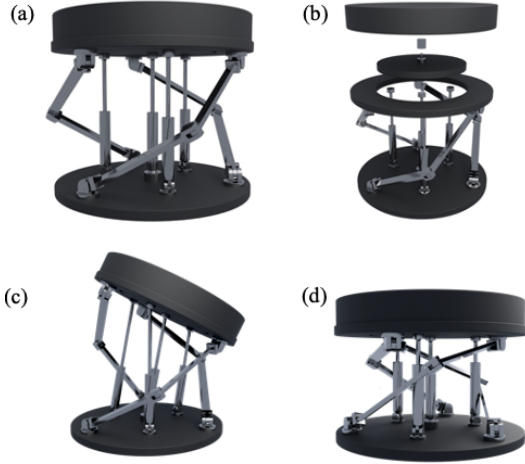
Assembly of the 3SPS-S-3RRR mechanism (a), exploded view of the assembly (b). Assembly of the mechanism while flexing and extending (c), and while pronating and supinating (d).
